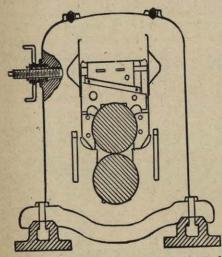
Roll Housing, with wedge instead of pins and boxes.
